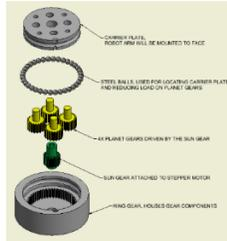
Exploded View of Planetary Gearbox (Inventor)
